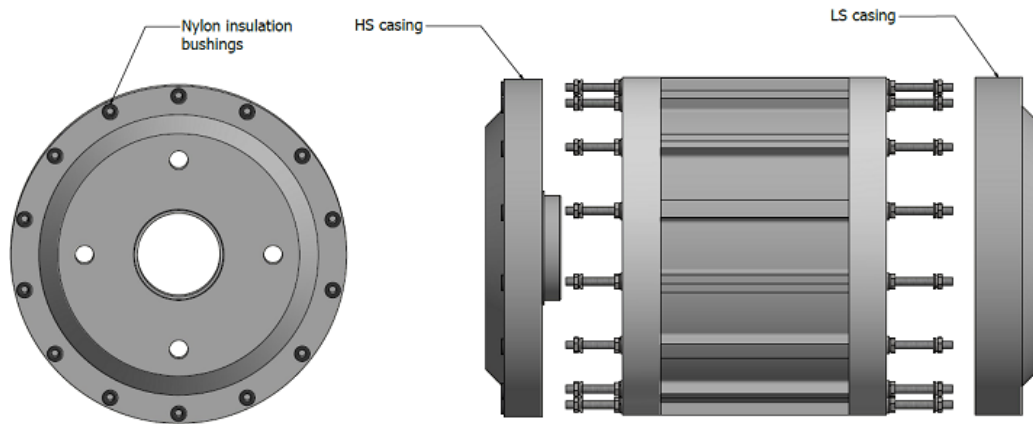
Front view and side view of the casing and PM carrier assembly
